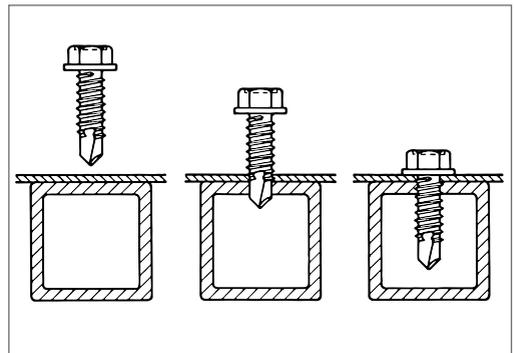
Direct screwing with sheet metal screws with drill bits
